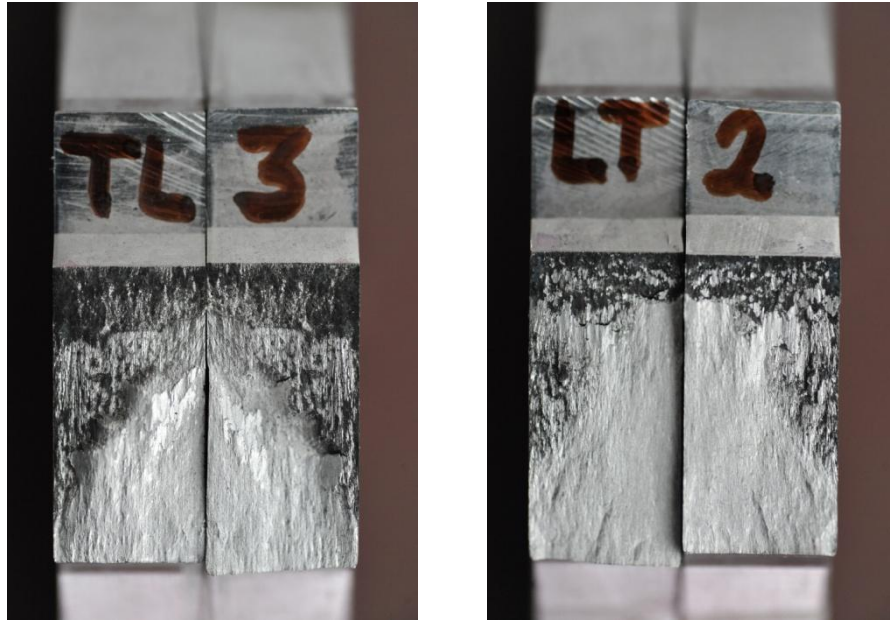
21 Fracture surfaces of mode II fatigue crack growth specimens.
